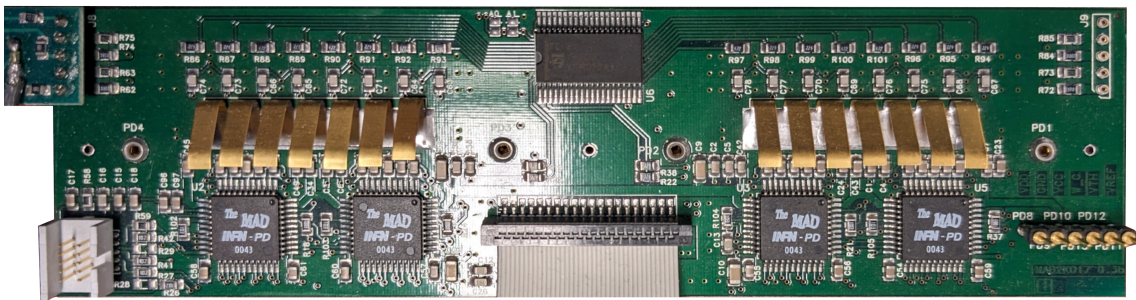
Figure shows the front-end board in a close up. Four MAD chips are soldered close to the bottom edge of the front-end electronics.
